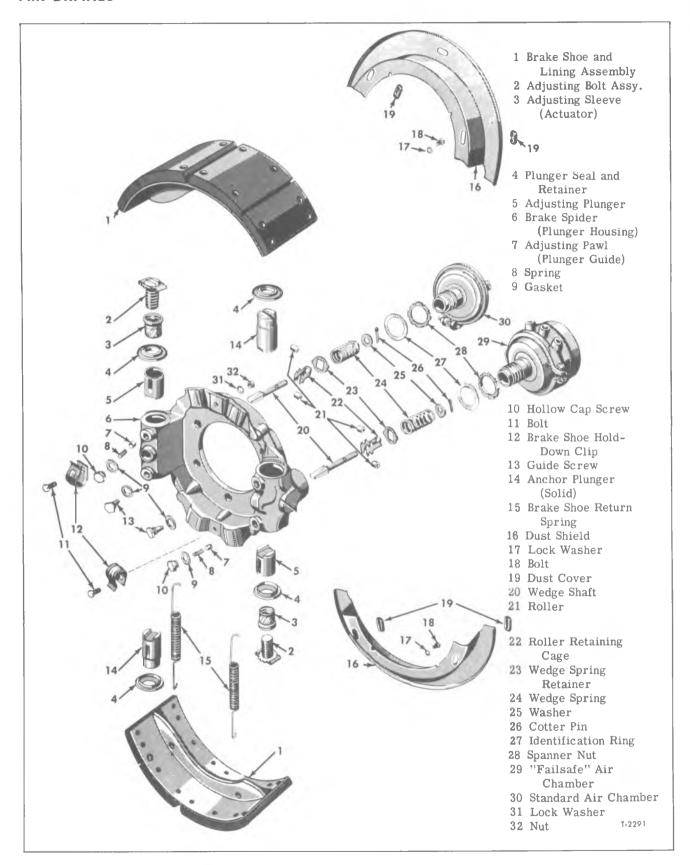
Stopmaster Brake Components (Automatic Adjuster with "Fail-Safe")
